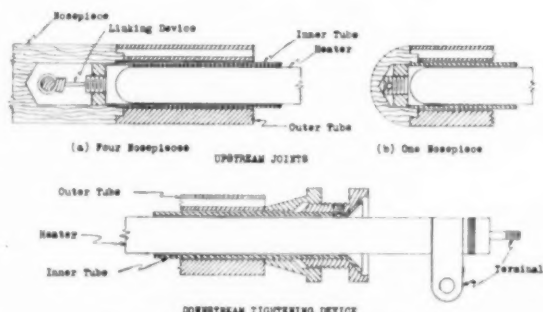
HEAT-TRANSFER ELEMENT DETAILS
